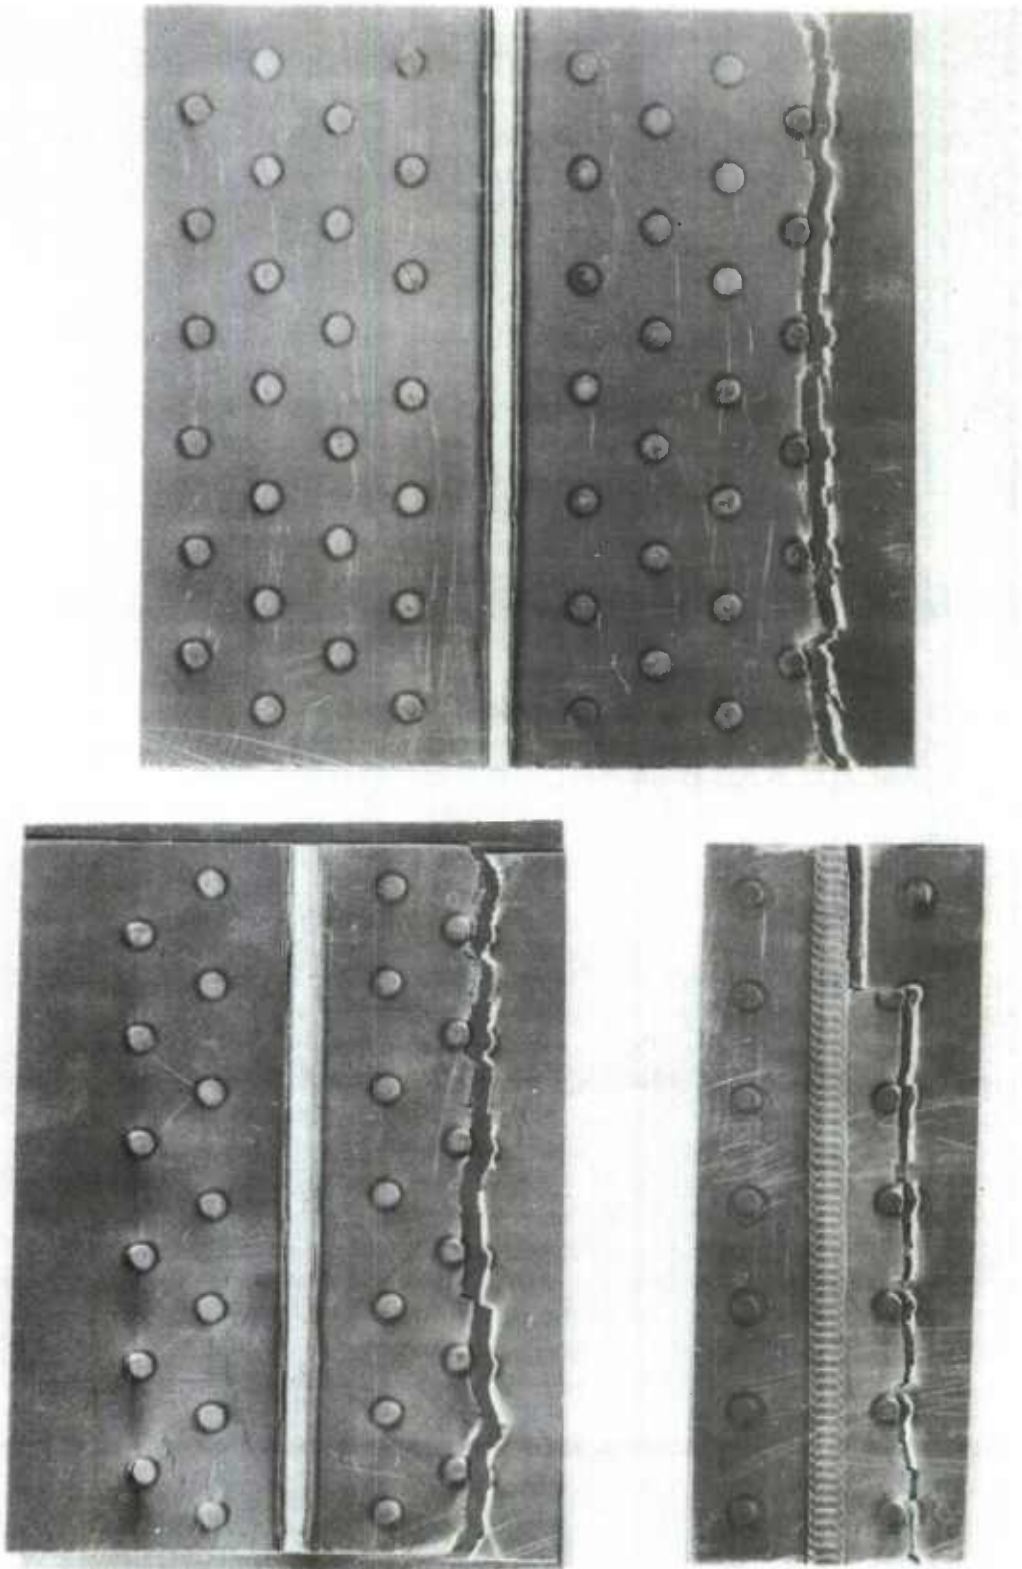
Fractured Fatigue Specimens - AM-355 SS (78° F)
